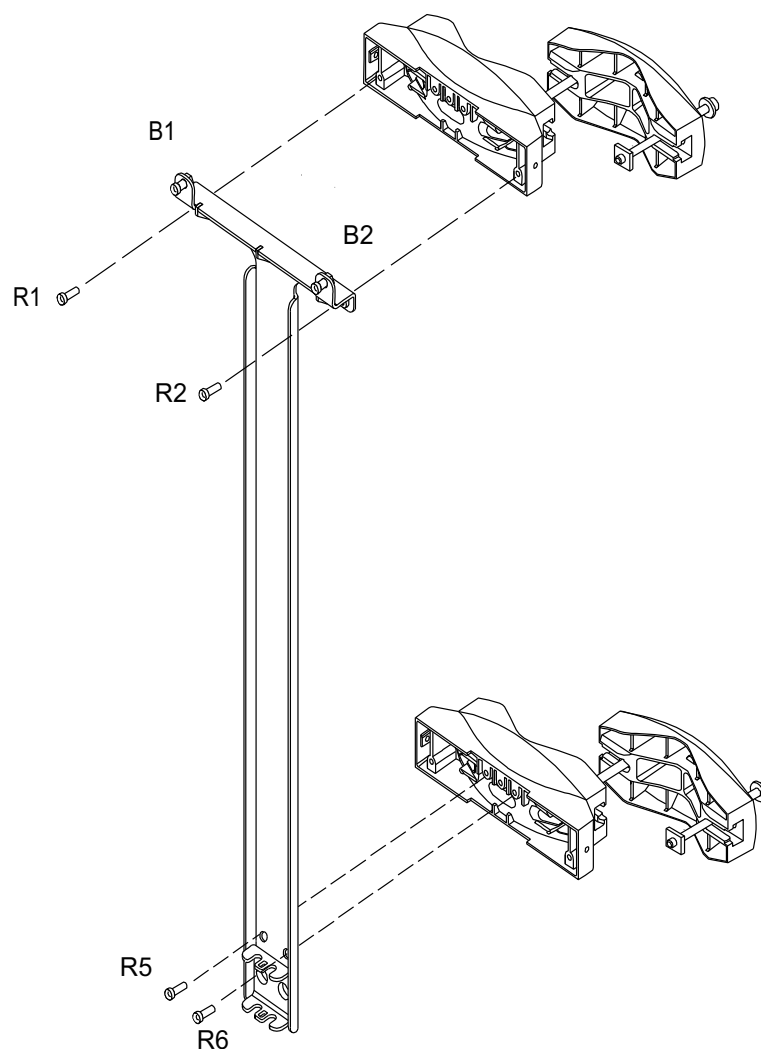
Attaching the mounting rack and the pole brackets with the pole mounting kit version 1
